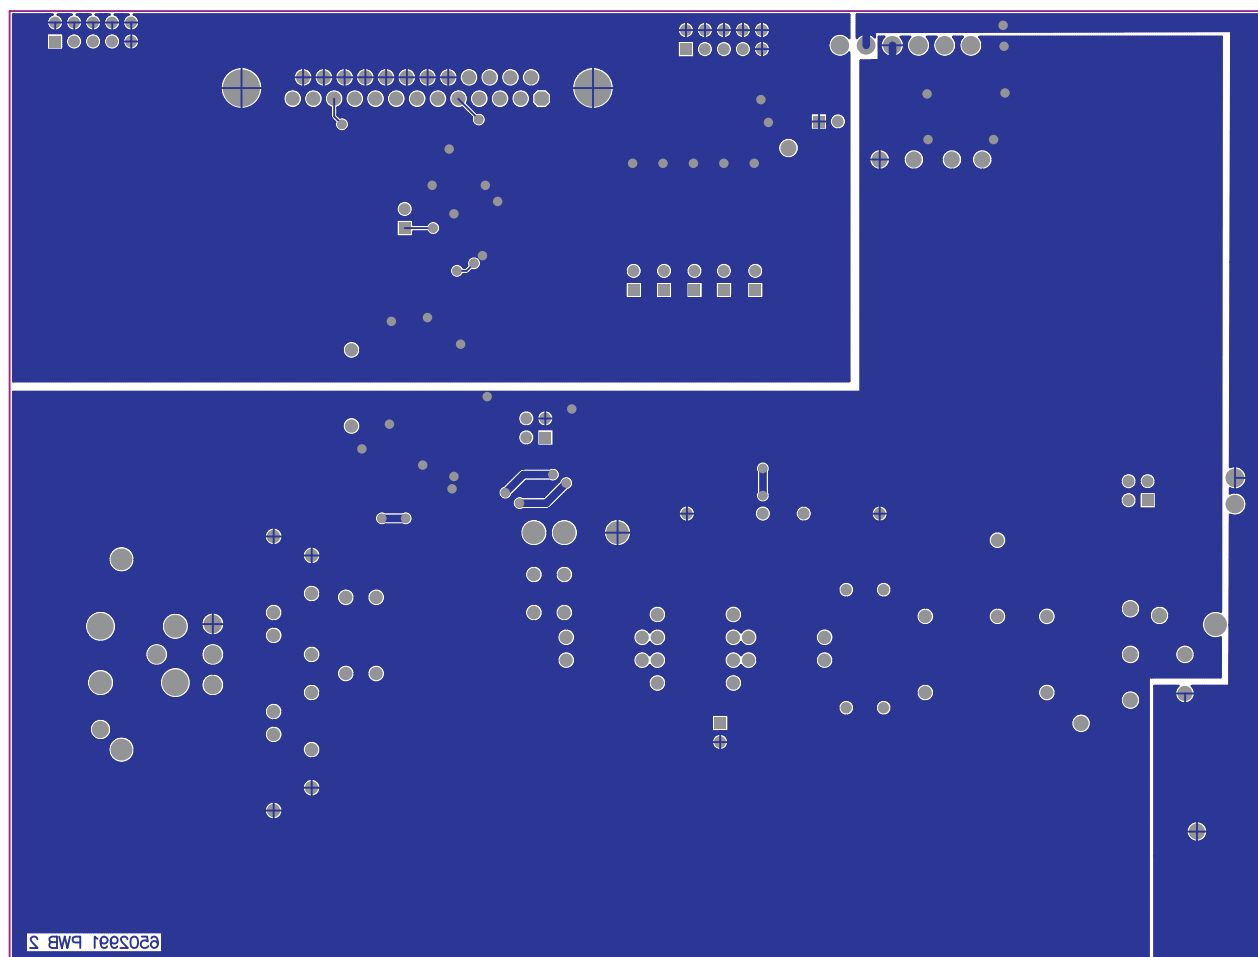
PGA2505EVM PCB Bottom Layer (Solder Side)
